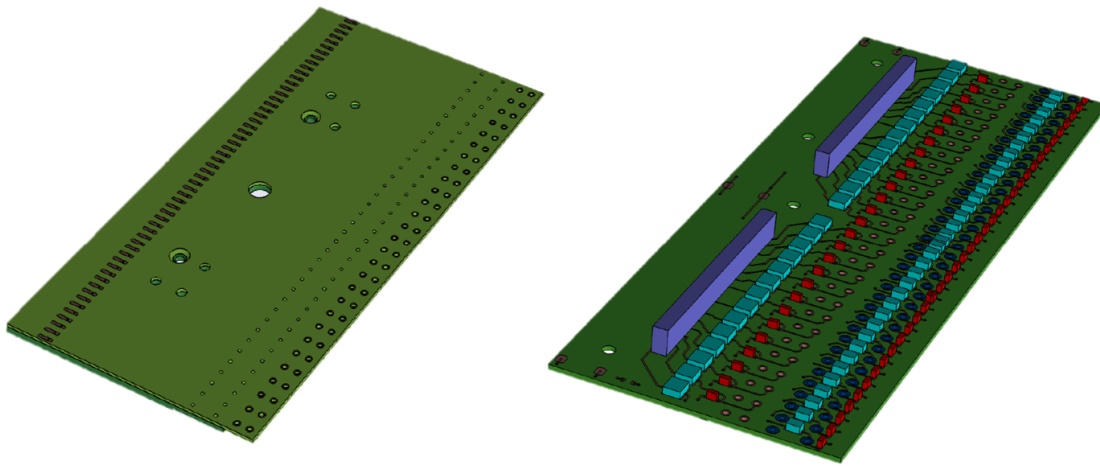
Left: Design of a wire-bonding board for the x wires. The wires are glued on the leading edge of the top surface, and then soldered to the soldering pads. Right: Another board, located underneath the four wire-bonding boards, carries the RC network for the bias voltages.
